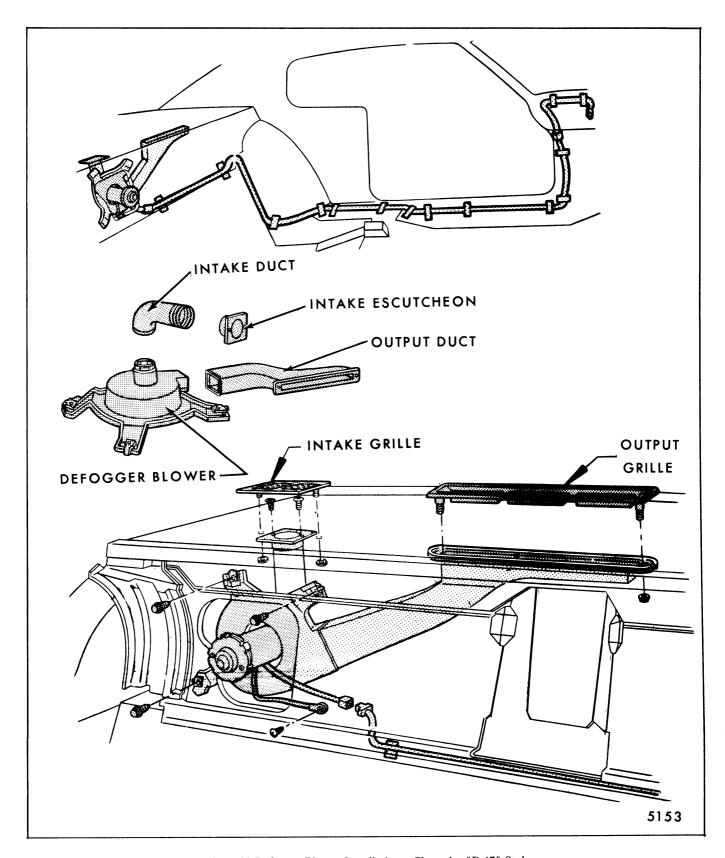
Defogger Blower Installation - Chevrolet "B-47" Style
